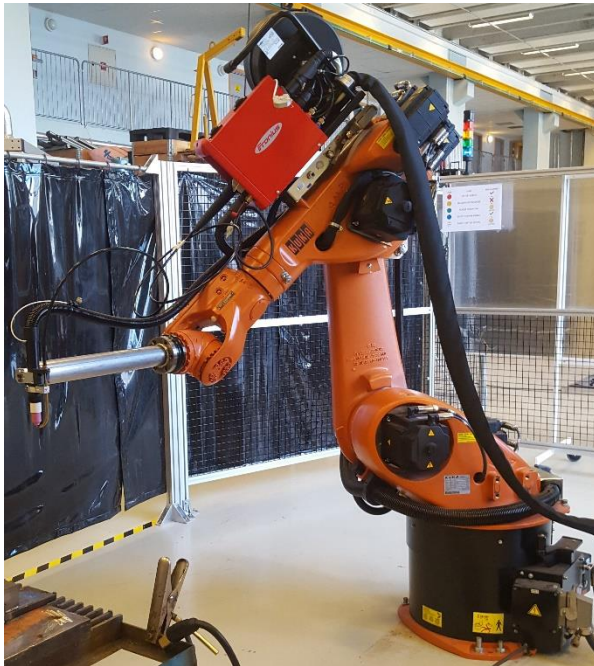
Kuka robot mounted with KD 4000 feeder and weld torch
